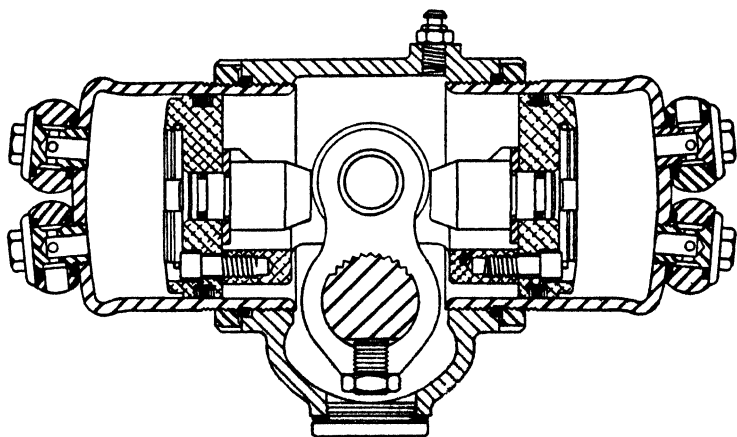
GEMMER HYDRAGUIDE, SECTION THROUGH CYLINDERS.
